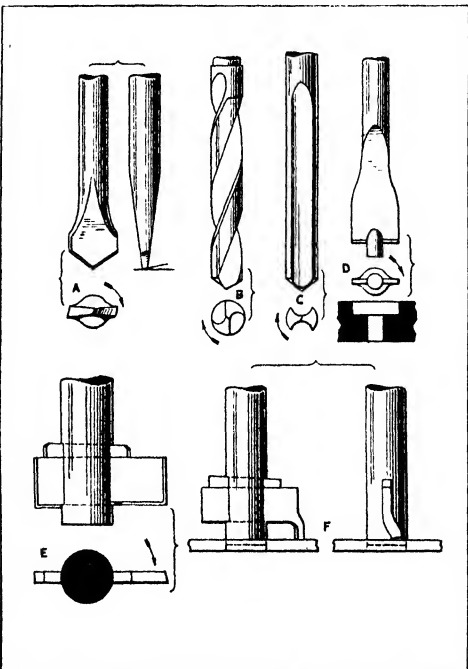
METAL DRILLS. (A) FLAT. (B) TWIST. (C) STRAIGHT FLUTED. (D) PIN. (E) ARBORIZING. (F) TOOL FOR BORING SHEET METAL.
